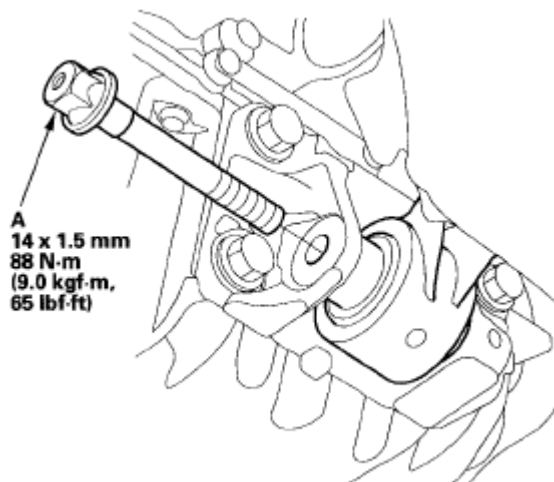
Identifying Lower Torque Rod Bracket Bolt (With Torque Specifications)
